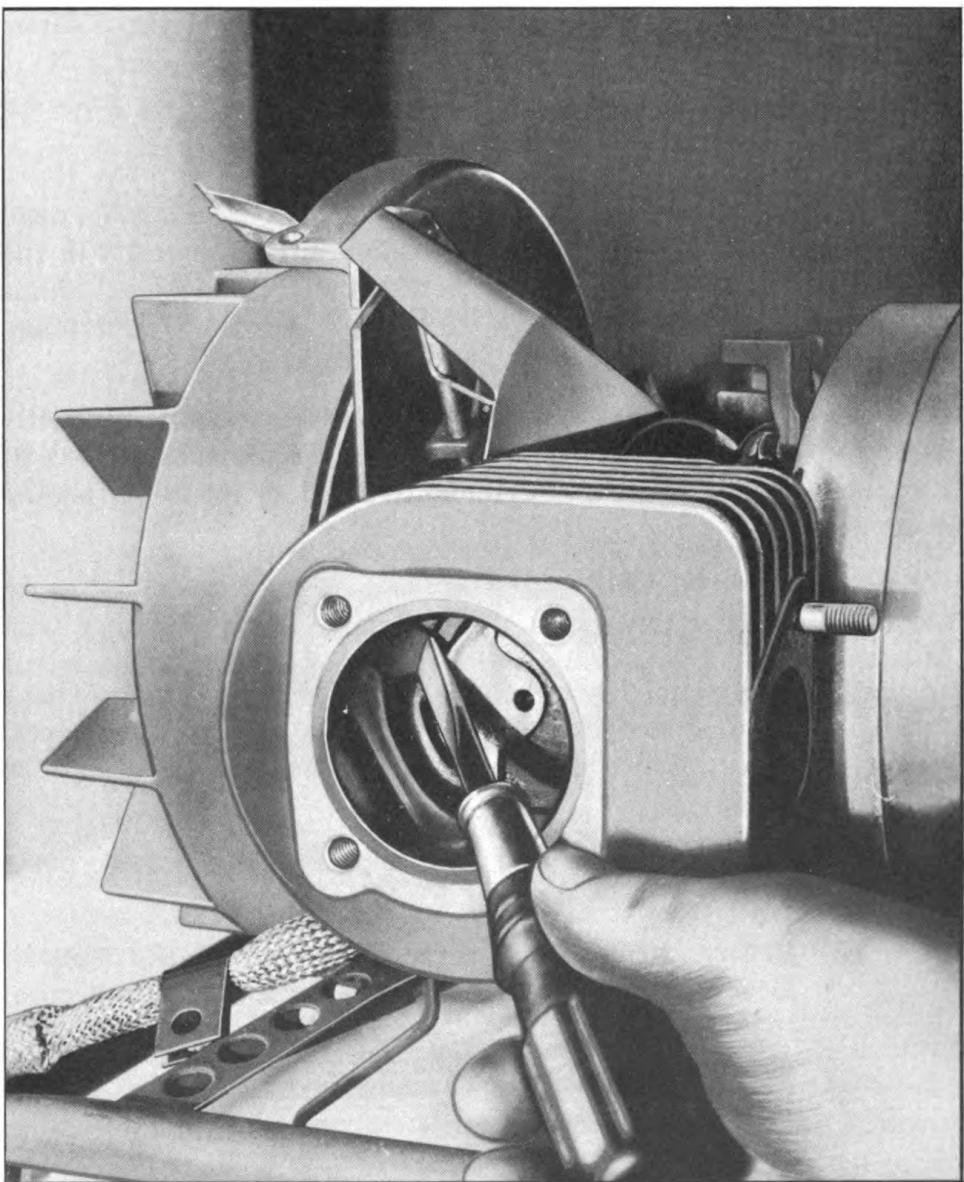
CAREON REMOVAL—INTAKE PORTS
